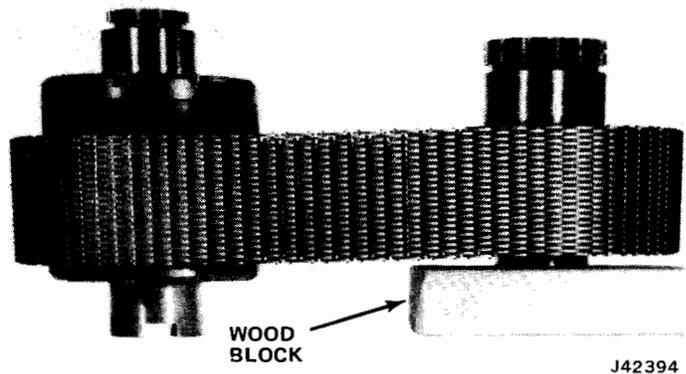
Drive Chain Positioned Around Differential and Drive Sprocket
